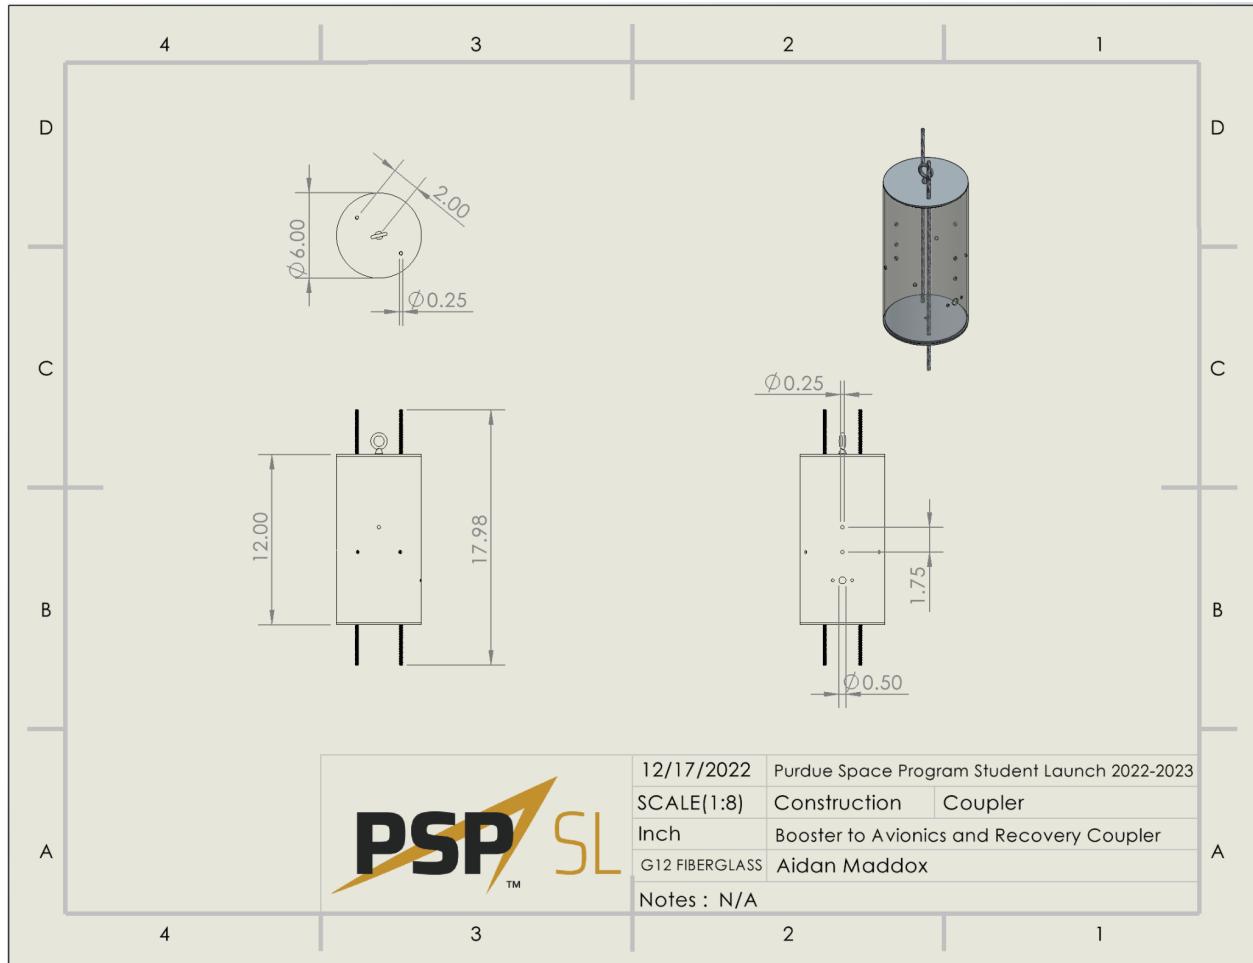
Technical Drawing for Coupler
